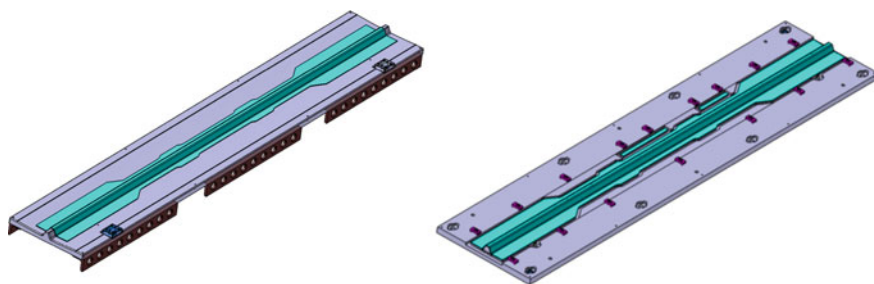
Omega stringer manufacturing tool and machining fixture design—sample pictures
